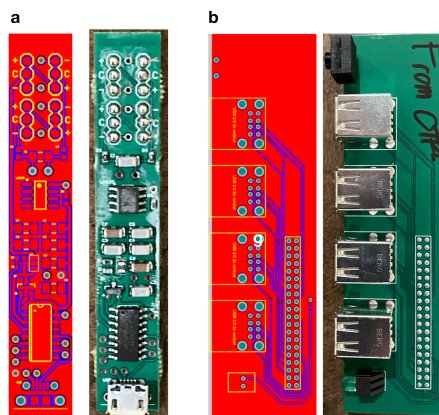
Custom PCBs. a, Data acquisition PCB for HX711 and strain gauges. Layout (left) and photo (right). b, Microcontroller interface PCB. Layout (left) and photo (right).
